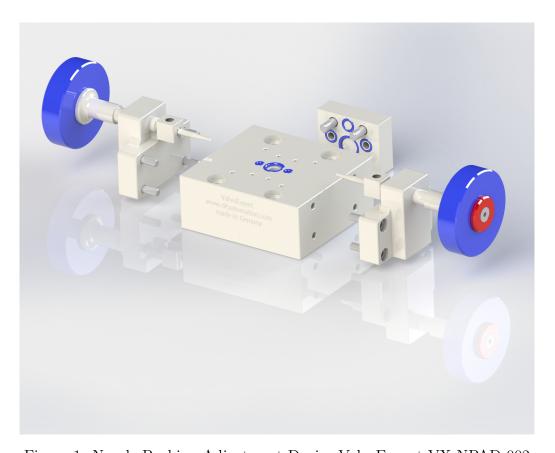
Nozzle-Pushing Adjustment Device ValveExpert VX-NPAD-002
